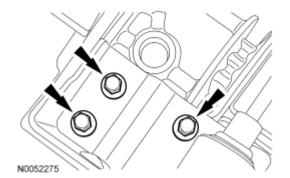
Locating Thermostat Housing-To-Lower Intake Manifold Bolts Courtesy of FORD MOTOR CO.
